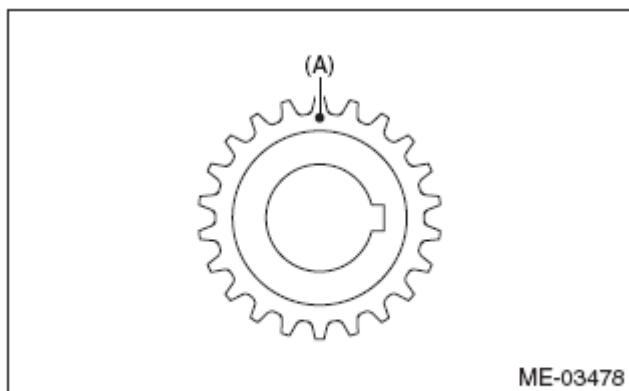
Aligning Exhaust Cam Sprocket To Twelve O'Clock Position
